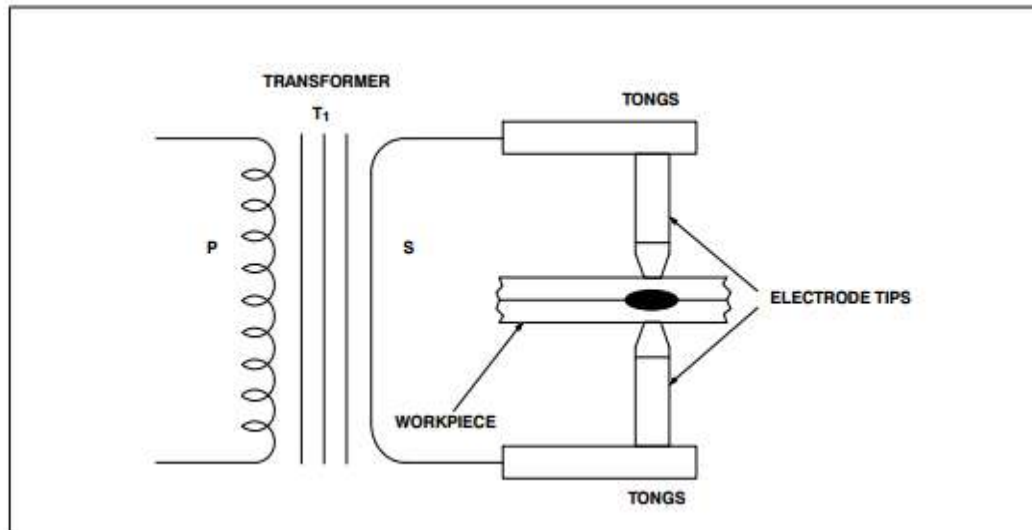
Resistance Spot Welding Machine with Workpiece. (Luo Yi et al., 2009).
